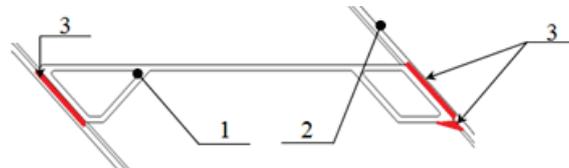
Scheme arrangement of welds for the examined aluminium stair-step: 1 – tread, 2 – stringer (side member), 3 – continuous fillet weld
